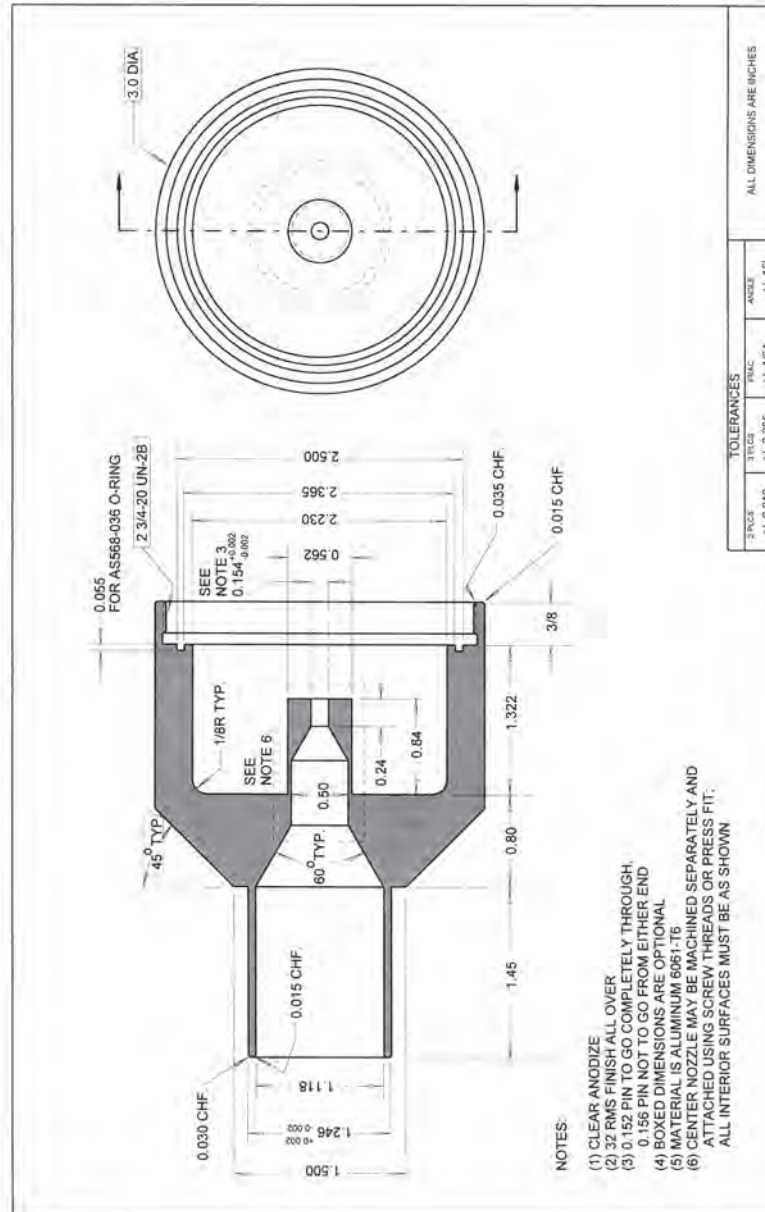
2.5-MICRON IMPACTOR ASSEMBLY
